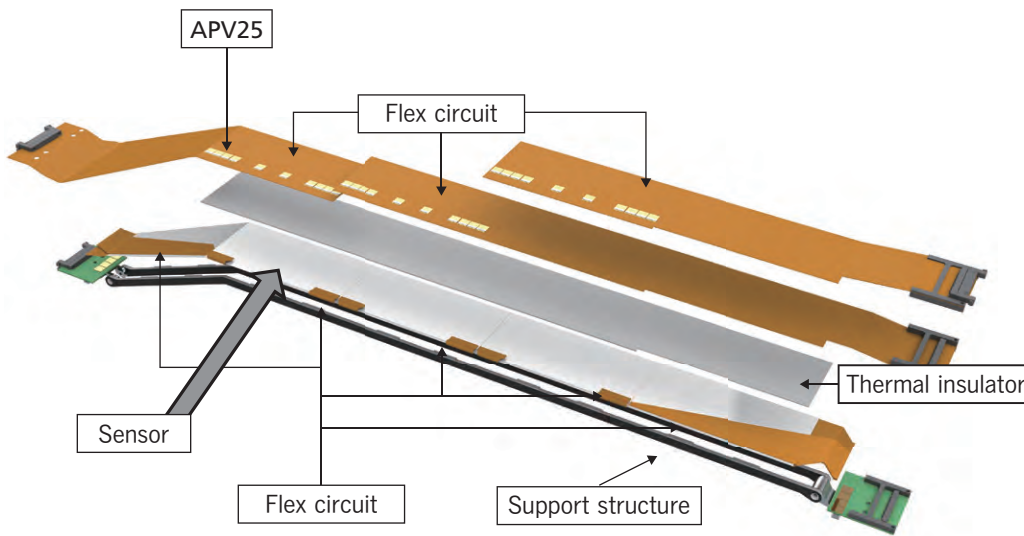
Exploded view of an SVD ladder of the fourth layer. The black parts at the bottom are ladder supports. Five sensors are arrayed on the supports. The brown parts on the sensors are readout flex circuits.
